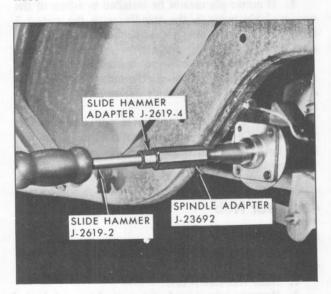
Removing and Installing Rear Wheel Spindle
